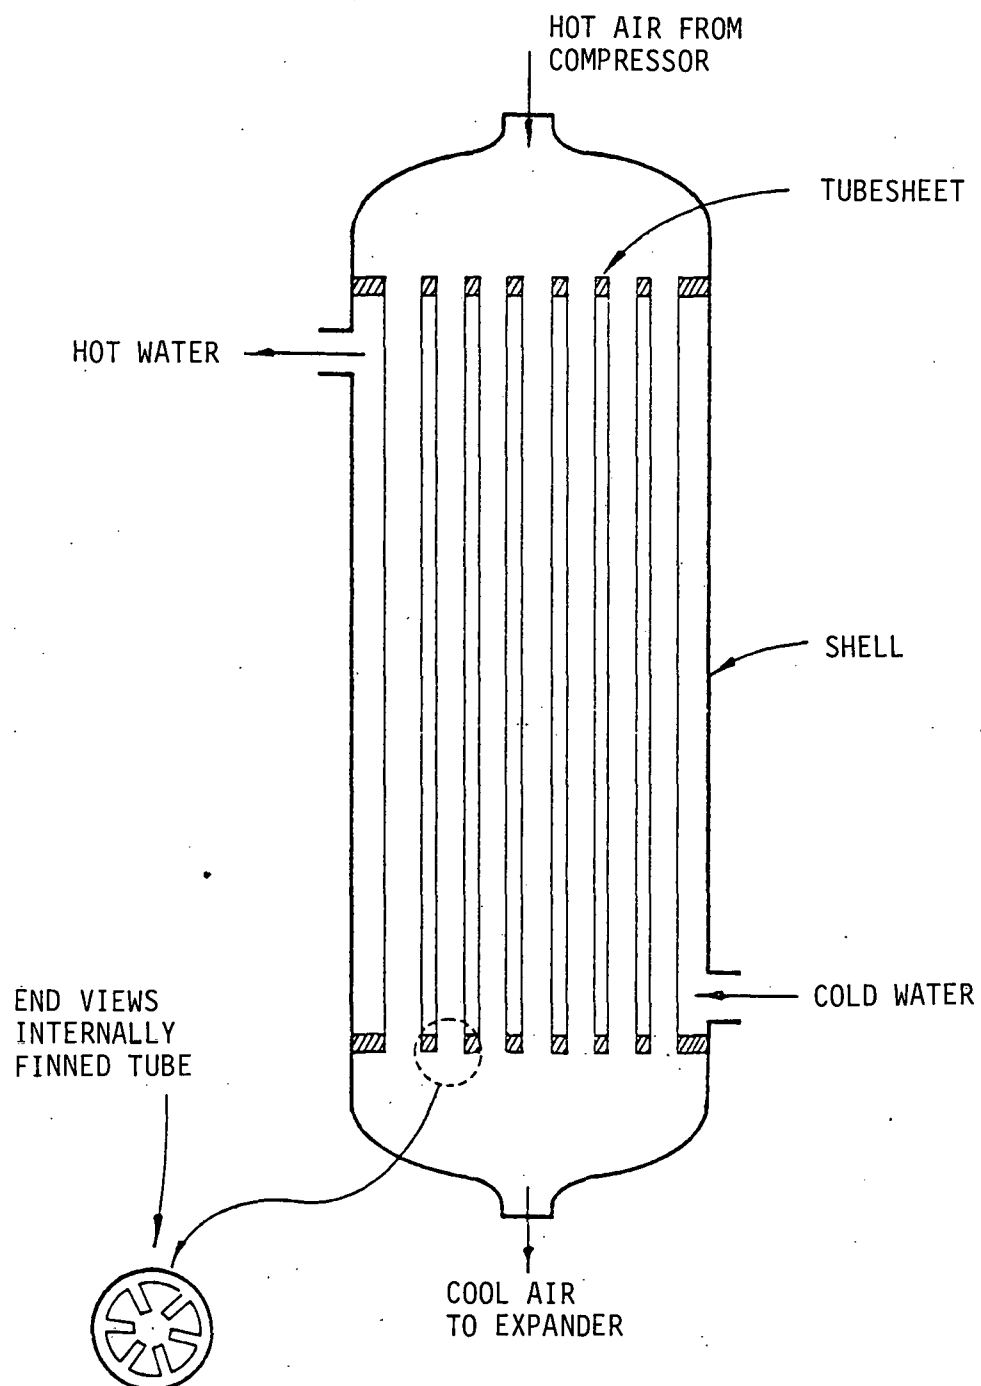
Internally Finned Tube and Shell Heat Exchanger
